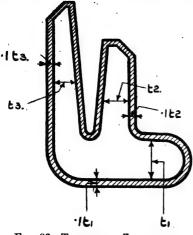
Tolerance Zones for Typical Rubber Extrusion
